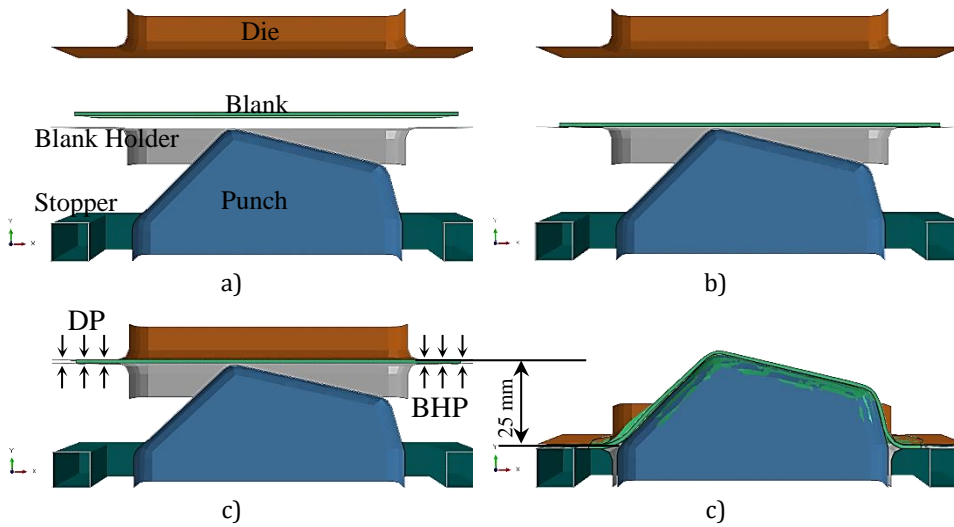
Deep drawing manufacturing range; a) Initial position, b) Blank set-up, c) Die action and application of BHP and d) Final position after 25 mm stroke
